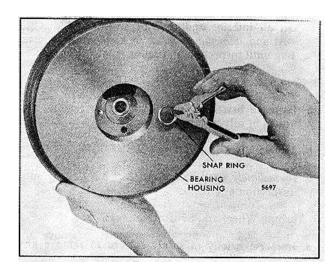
Removing Internal Snap Ring from Bearing Housing
